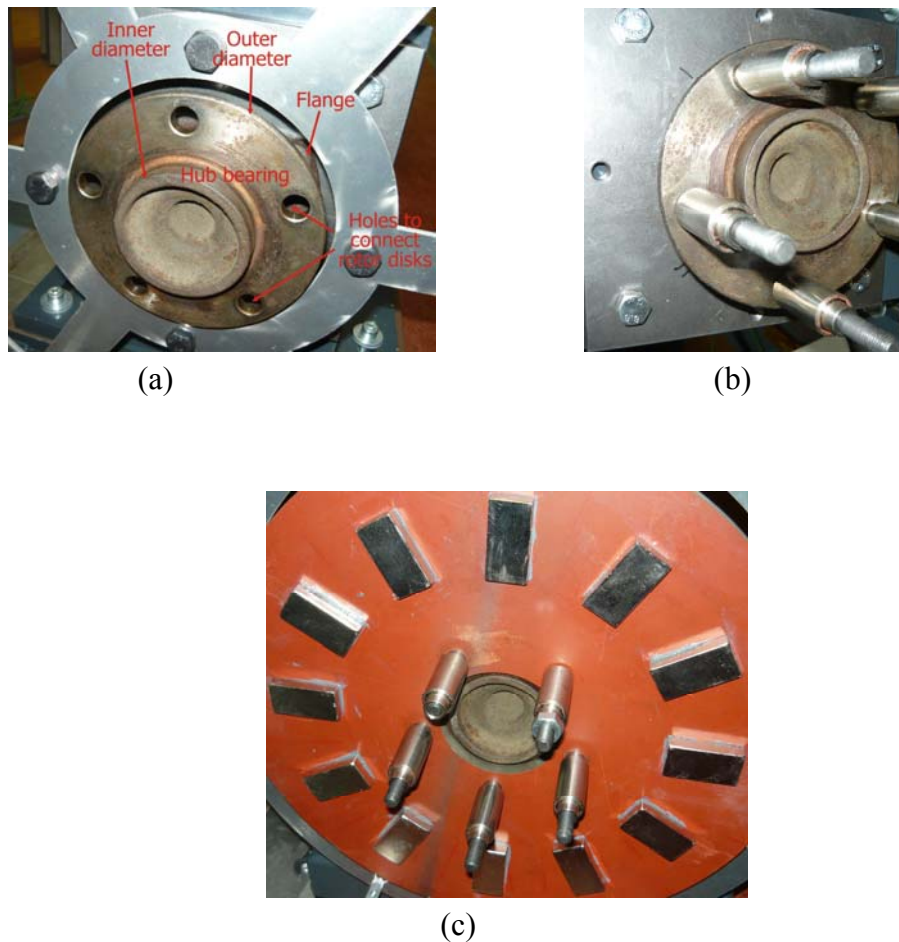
Photo of rotor: (a) hub bearing assembly showing outer and inner diameter, (b) hub bearing with bolts inserted, and (c) one rotor disk connected. The holes connect the bearing to the two rotor disks. The flange can be seen partially obscured behind the hub bearing (Figure 5.4(a)). It connects the stator via the housing to a rigid frame. The shaft (not seen) is at the back side behind the frame.
